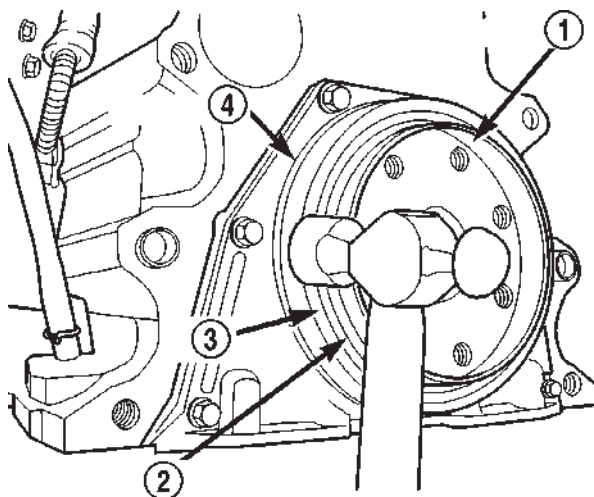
Seal Installation Using Alignment Tool and Hammer
